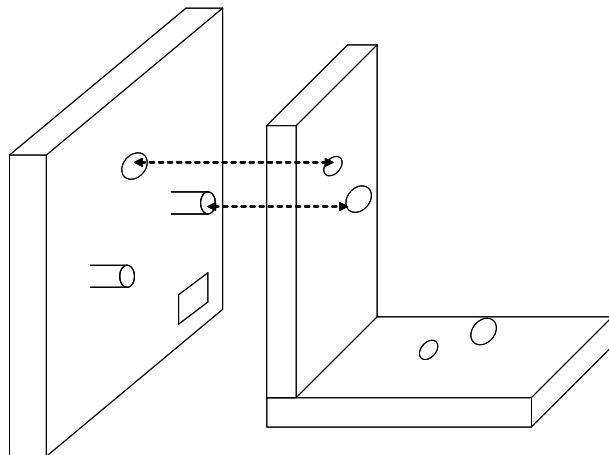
Mounting of the detector holder on the universal detector mount (LYNXEYE).
